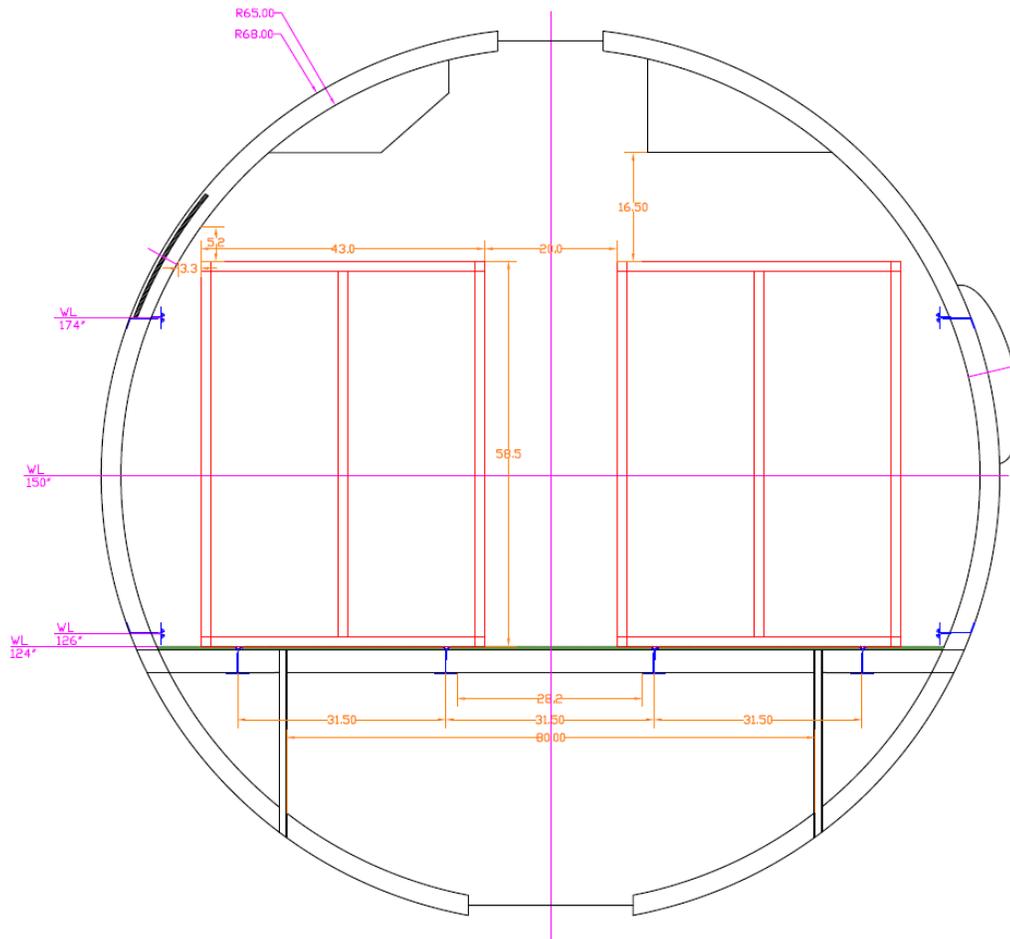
Fuselage cross section view with installed equipment racks and viewports
